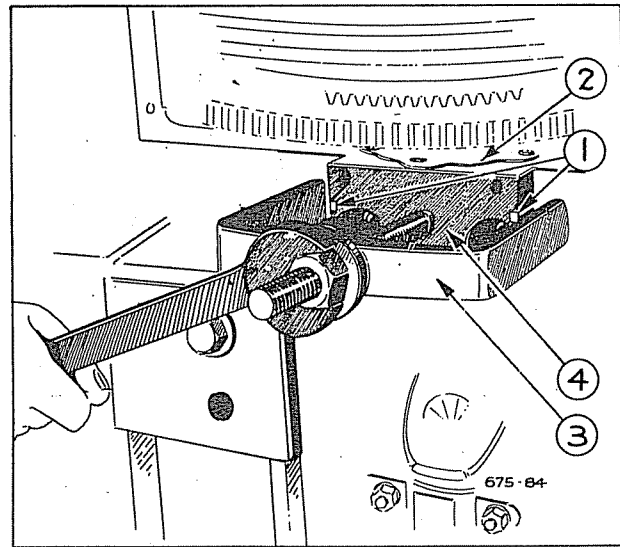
Removing Rear Main Bearing Cap with Tool C-305.
